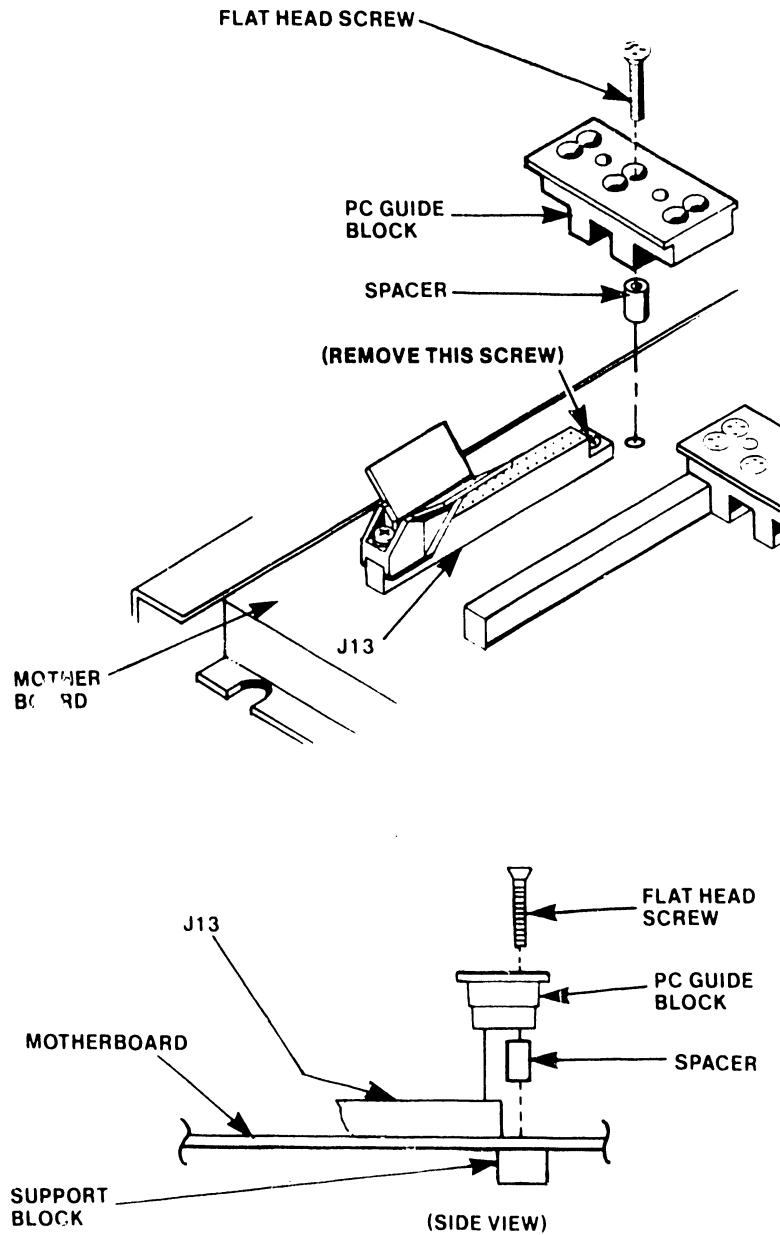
PC Guide Block Installation (105/115/125A/130A Only)
